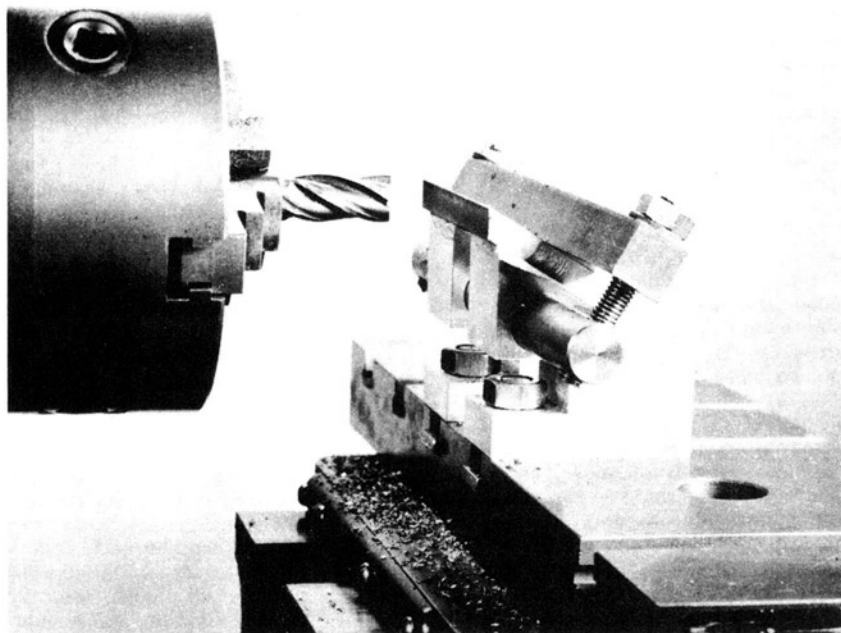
End milling the 60 deg. angled edge on the cross slide base.
